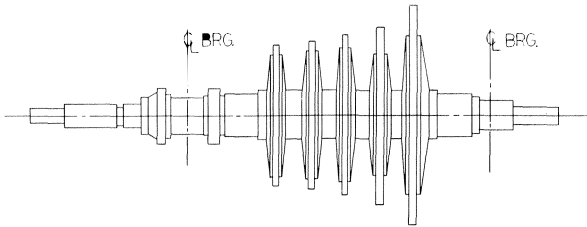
4,000 HP Five-Stage Steam Turbine Rotor.
